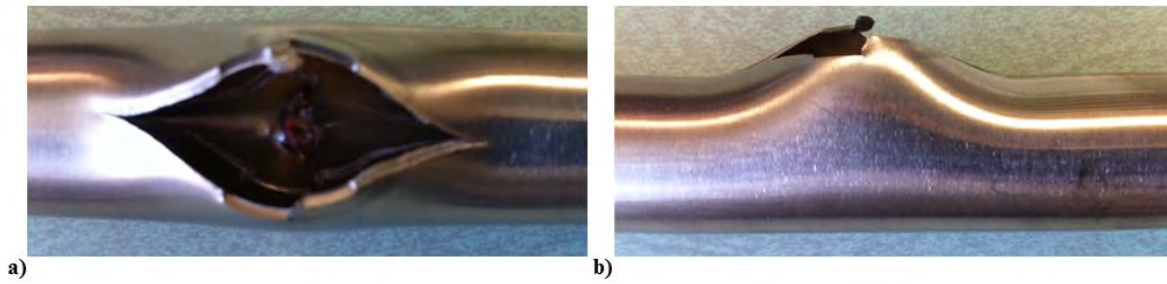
After burst shape of a typical 22.2-mm diameter tube with 6.35 mm initial notch: (a) top view and (b) side view
